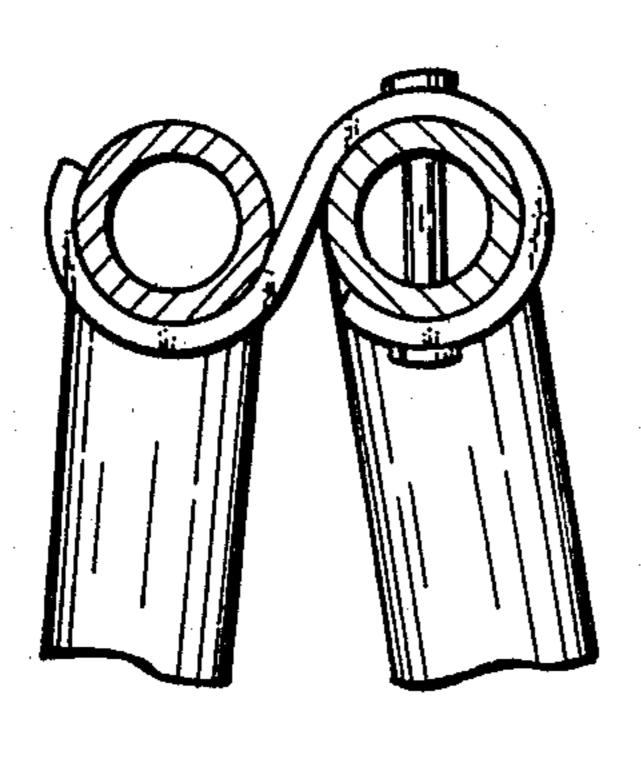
is an enlarged scale fragmentary cross-sectional view of the handle fastening of the embodiment of FIGS. 17 through 19.
